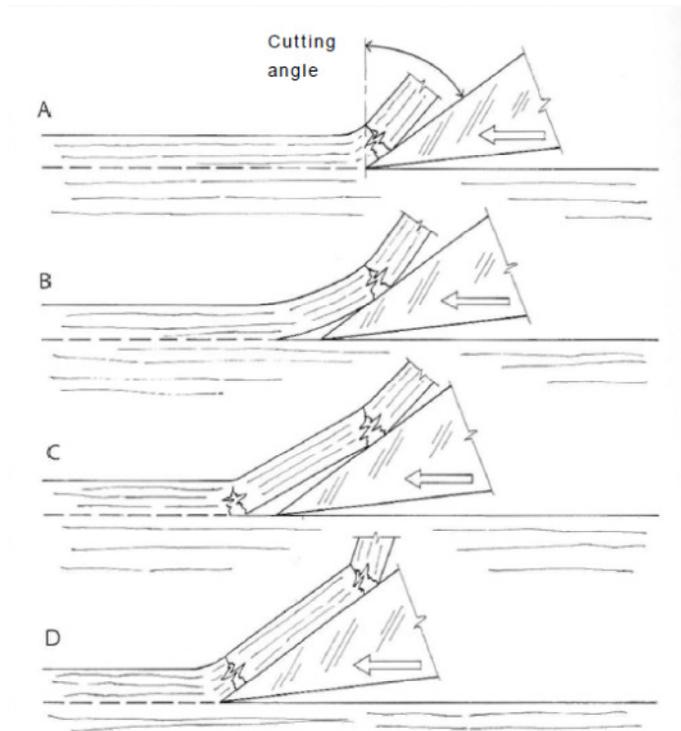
Cutting action: (A) the cut begins; (B) the chip bends as it slides up the knife, and the wood fails ahead of the edge due to tension perpendicular to the grain; (C) the chip breaks; (D) the next segment of the cut starts. In  $90^{\circ}$ - $0^{\circ}$  cutting, this is known as a Type 1 chip, produced by a relatively large cutting angle [4].
